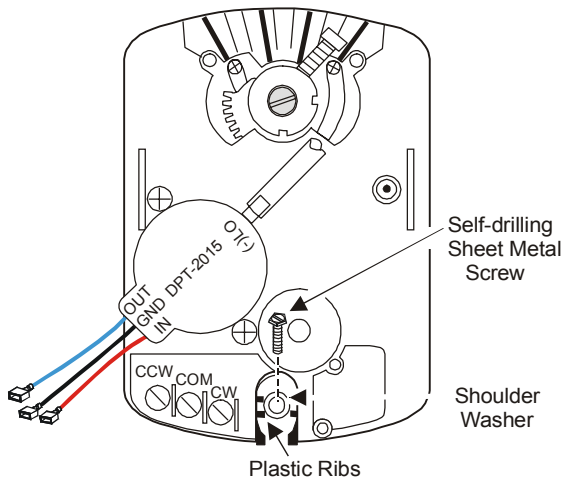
Shoulder Washer Position with Self-drilling Sheet Metal Screw
